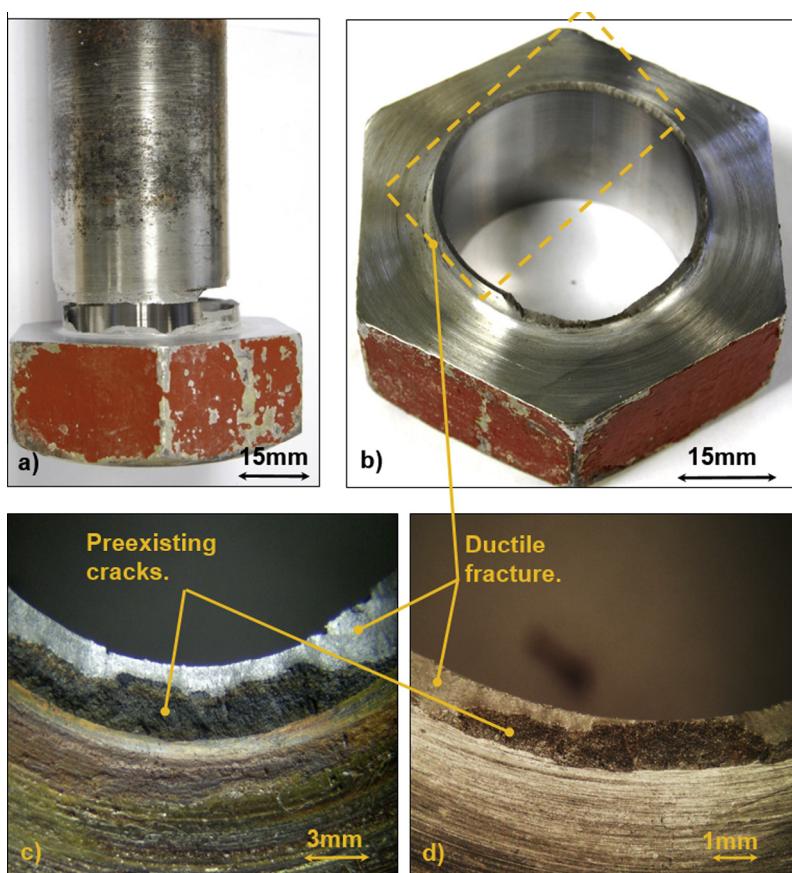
Preexisting cracks on components tensile tests; (a) fracture aspect on component tensile test; (b) region without preexisting cracks; (c and d) detail of preexisting cracks and ductile fracture.
